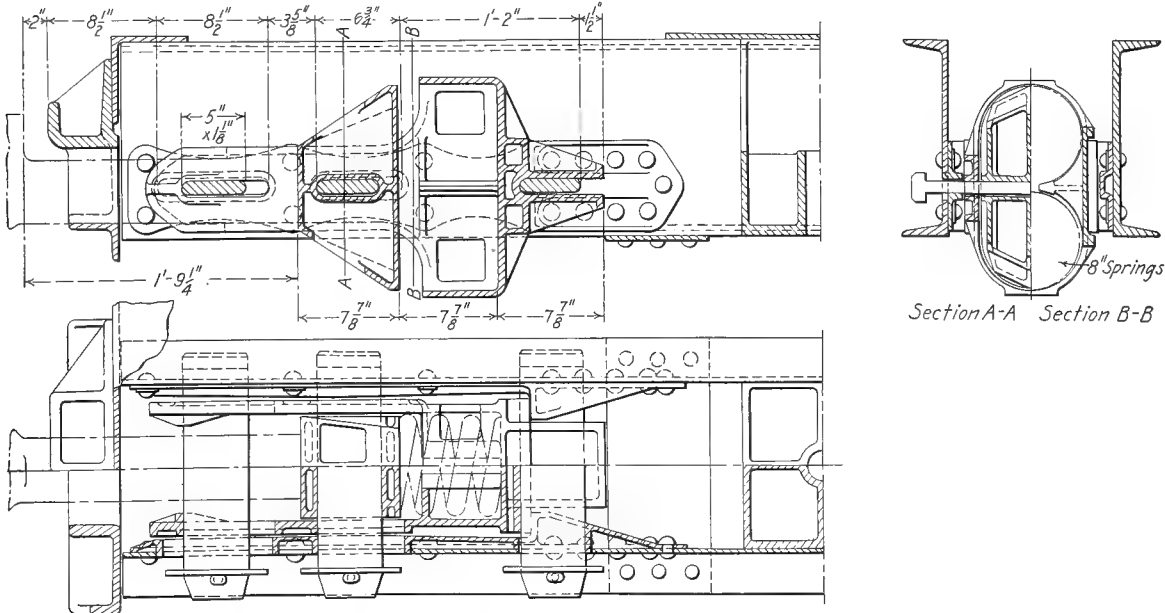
General Application of Universal Triple Key Yoke and Attachments for Class G Twin Springs. Universal Draft Gear Attachment Co.
